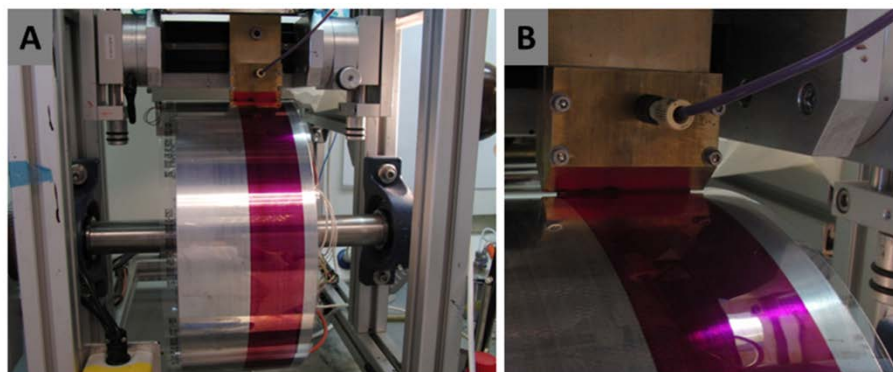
Slot-die coating of ECP-magenta on PET foil containing 13mm ITO stripes. (A) The small-scale roll coater including drum and rack (B) Enlargement showing a zoom in on the coating head, with the tube connected to the syringe pump (pump not shown).
